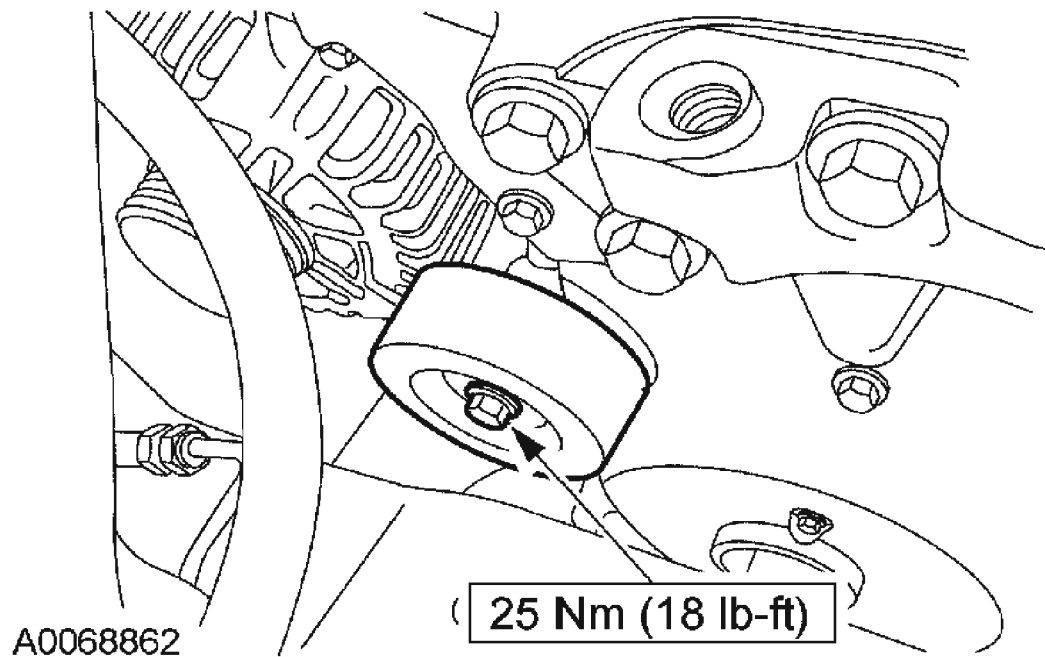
Installing Accessory Drive Belt Idler Pulley And Bolt
